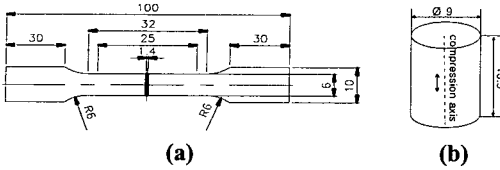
(a) ASTM E80 subsize specimen for tensile test, (b) Specimen for compression test
